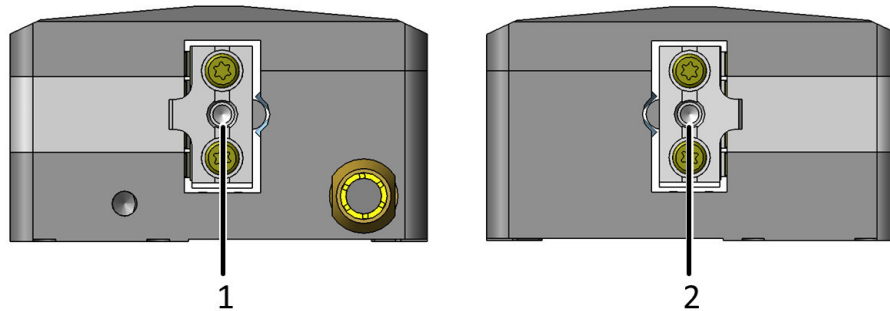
Lateral views of drive: Fixing the runner with M4 screws
